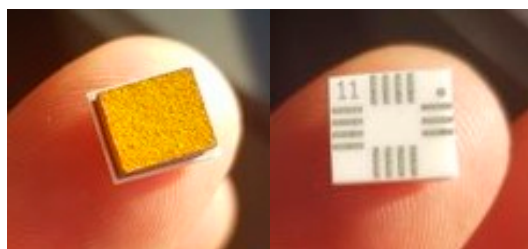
Pictures of the packed chip from top and bottom. The MEMS chip is flip chip bonded to a ceramic PCB (right) and covered with a porous filter cap (left).
